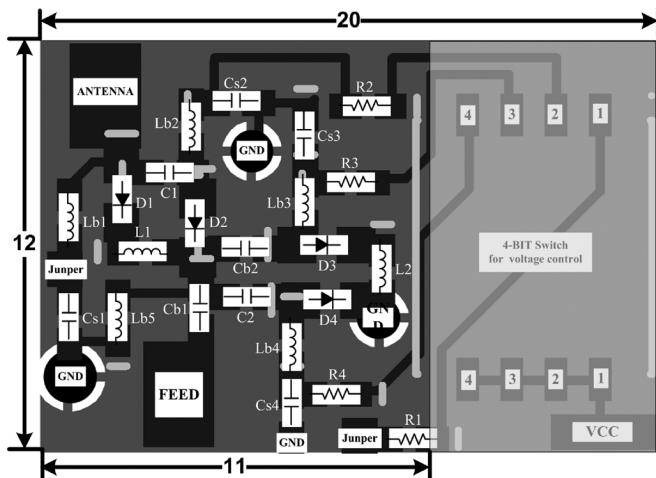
Dimension of switchable matching circuit PCB (unit: mm).
